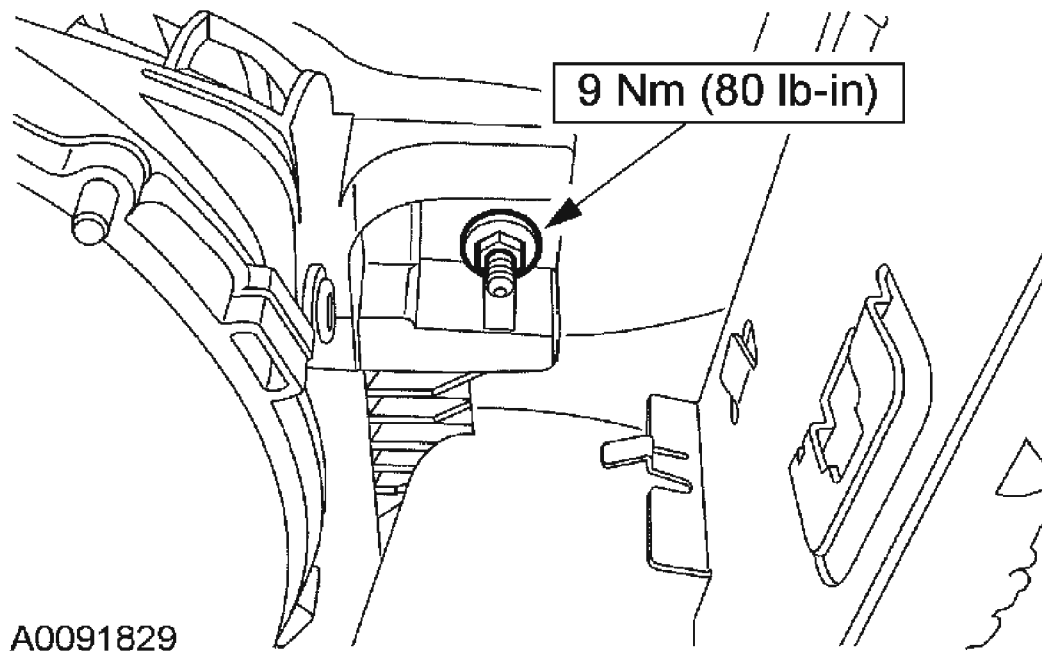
Removing RH Inner Heater Core And Evaporator Core Housing Nut
